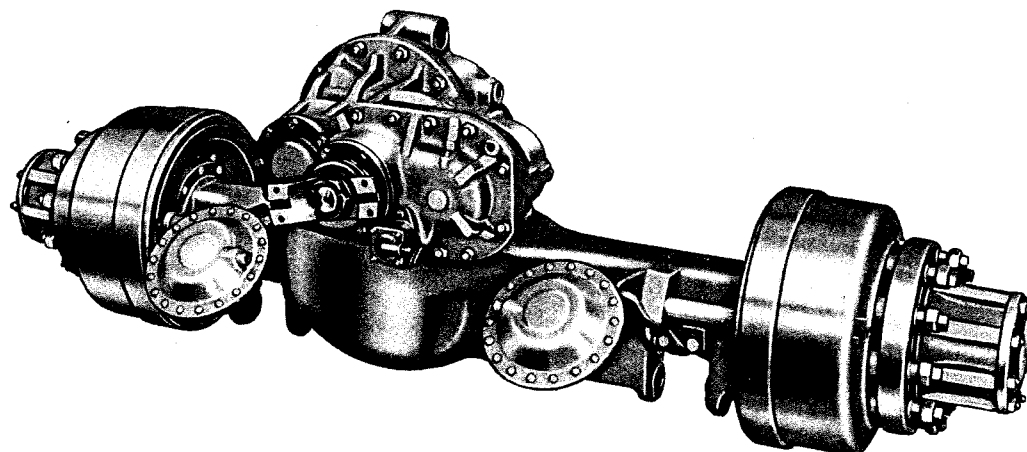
Forward Rear Axle Assembly for Model 50M Tandem Drive Axle
